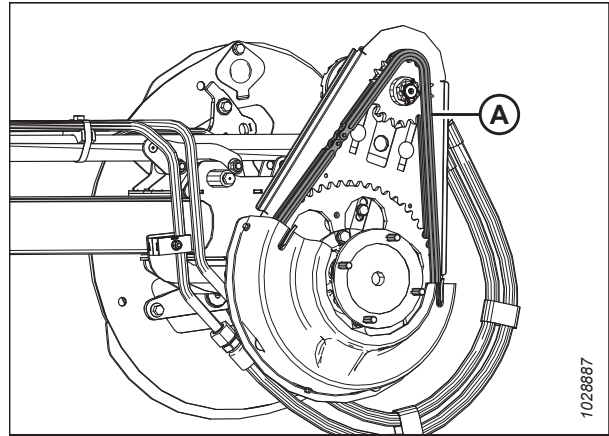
Drive Chain – Double-Reel Drive Shown
